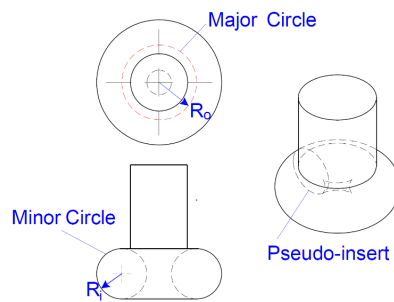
Geometry of toroidal cutter used for toolpath generation for 5 Axis machining.
